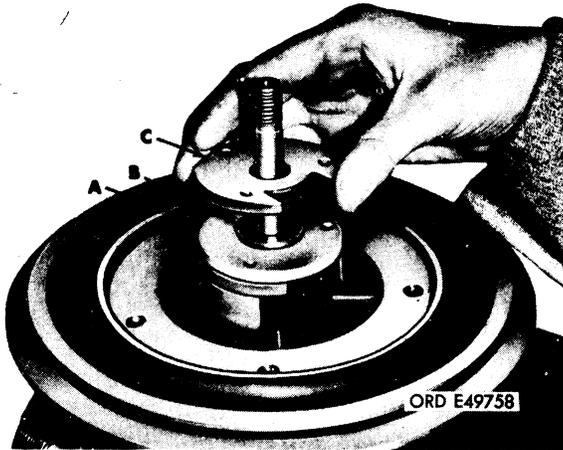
PLACING THRUST BEARING, THRUST RING, AND FRONT OIL RETAINER OVER SPACER SLEEVE - TURBOCHARGERS 10912638 AND 53591-C-139552.
